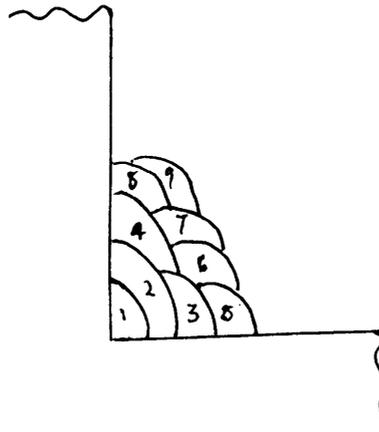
shows a sketch of the number and location of weld passes.
